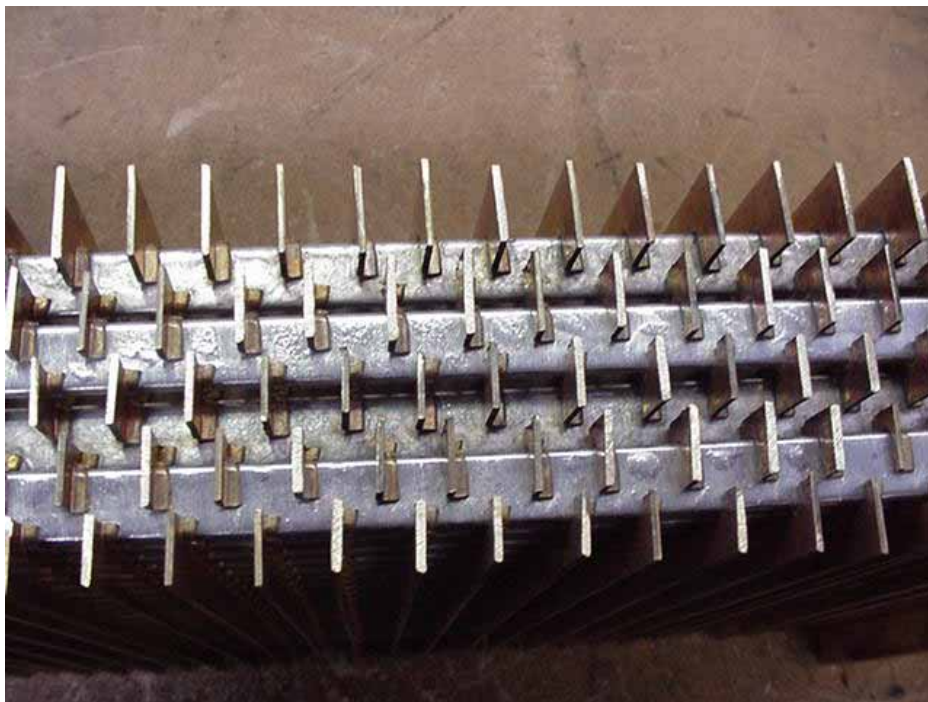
Top view of the Tube Strut Heat Exchanger
